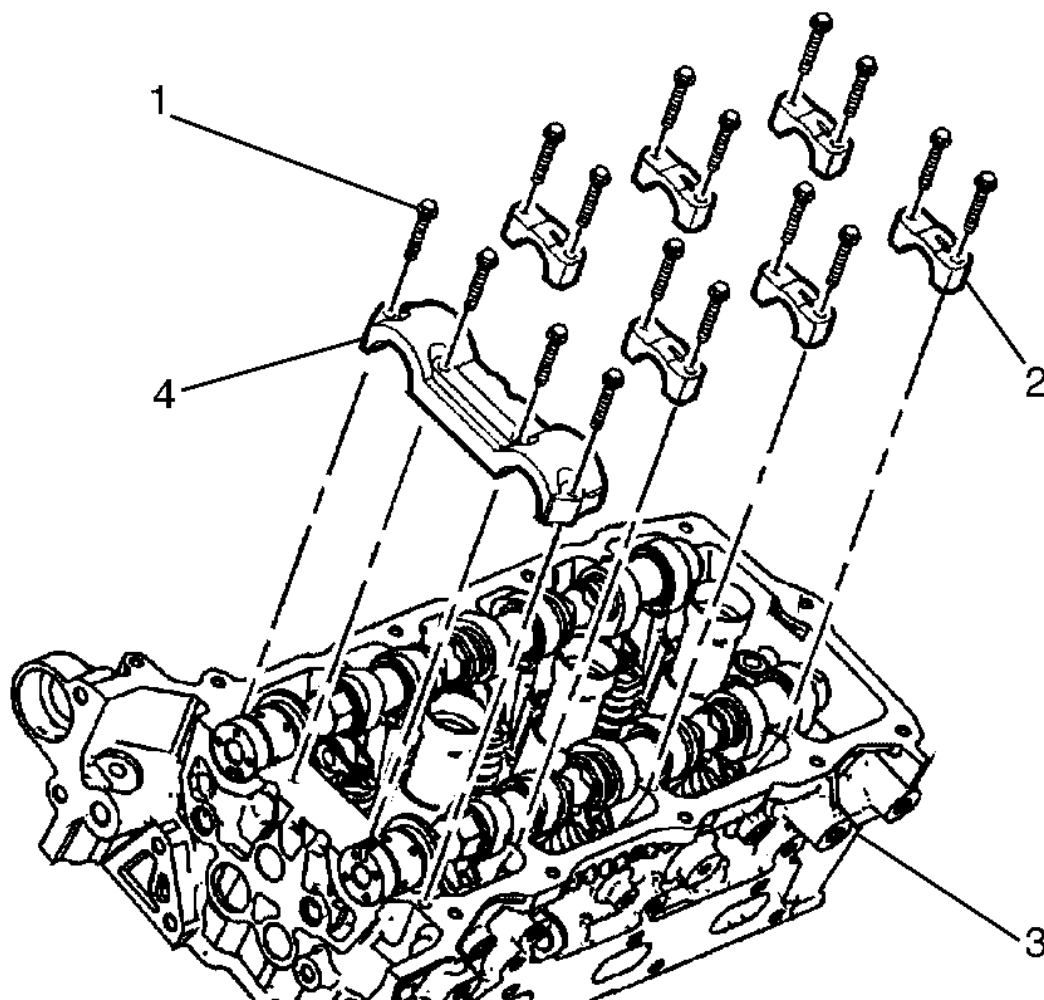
View Of Left Cylinder Head Camshaft Cover Rail
